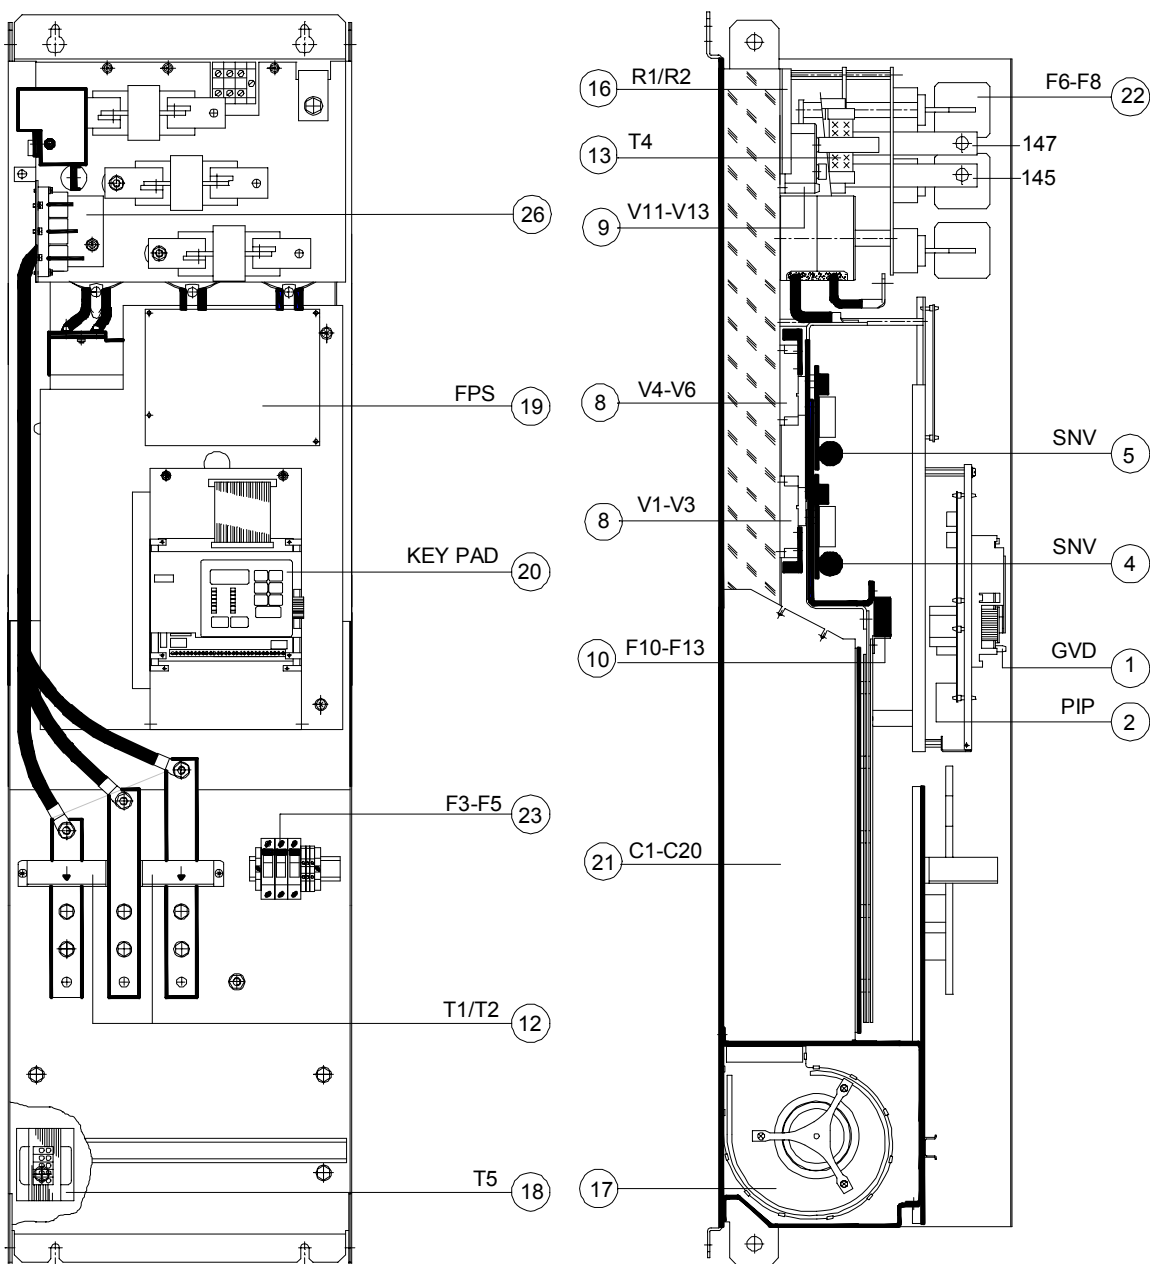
Arrangement of the replacement parts for GV3000/SE type AC305/360 and DC360.
